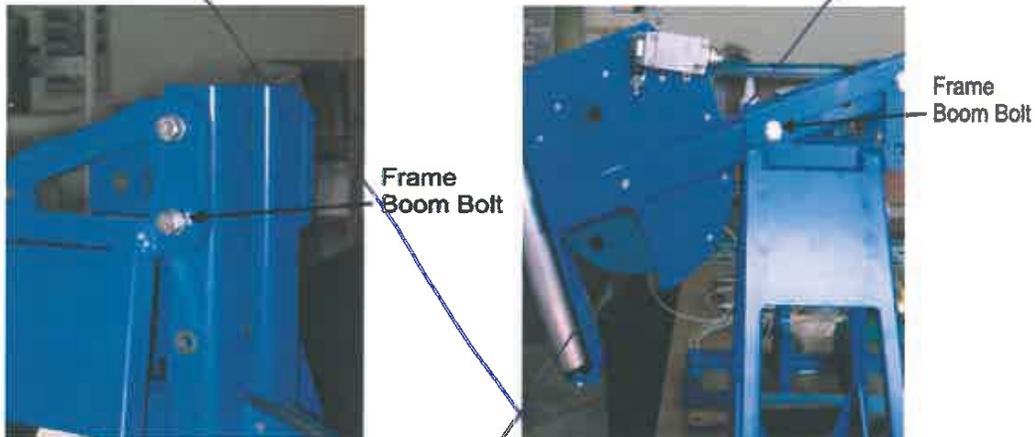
Frame Boom Bolt and Sheave in Operating Position
